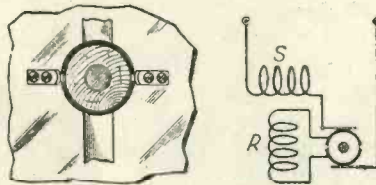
Section of the commutator arrangement. The connections are also shown.
